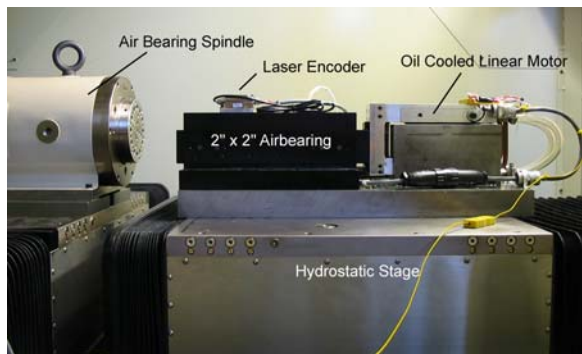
Photo of the prototype FTS mounted to the Moore Nanotechnologies machine base
